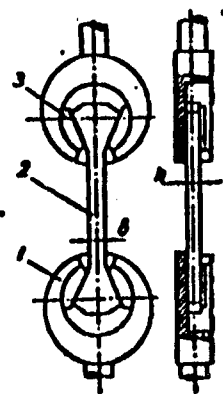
Diagram of attaching specimens in vises in tests for elongation: 1 - heads of vises; 2 - specimen; 3-thrust bearings.
